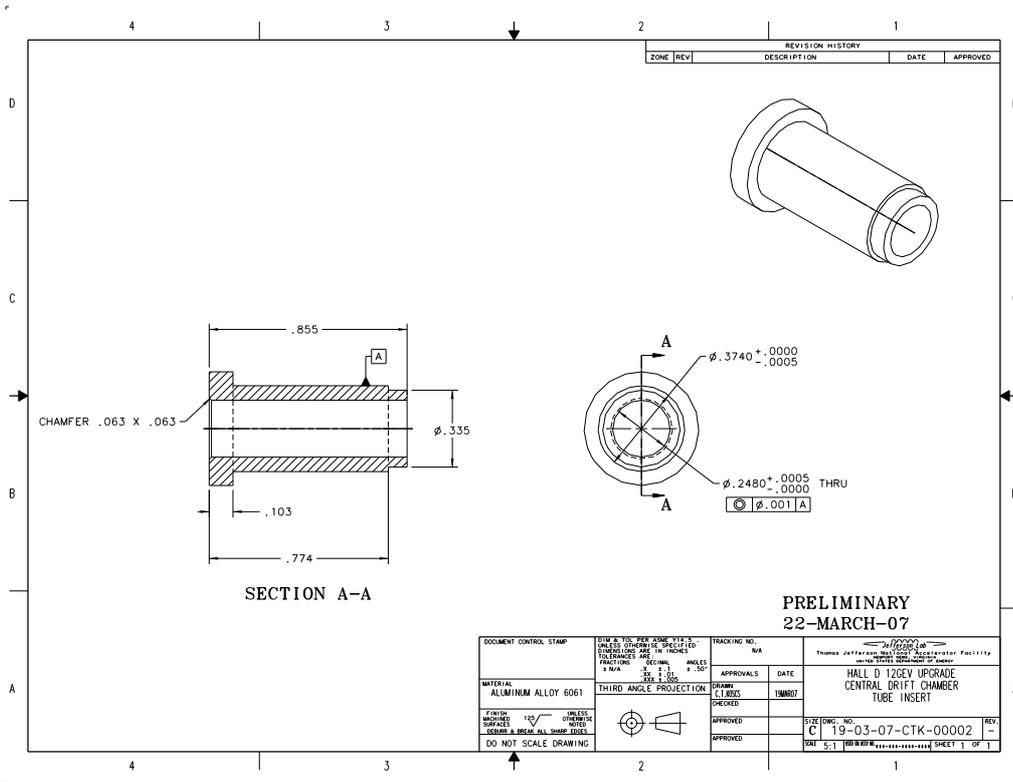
A mechanical drawing of one of the straw-tube donuts inserts for the CDC.
